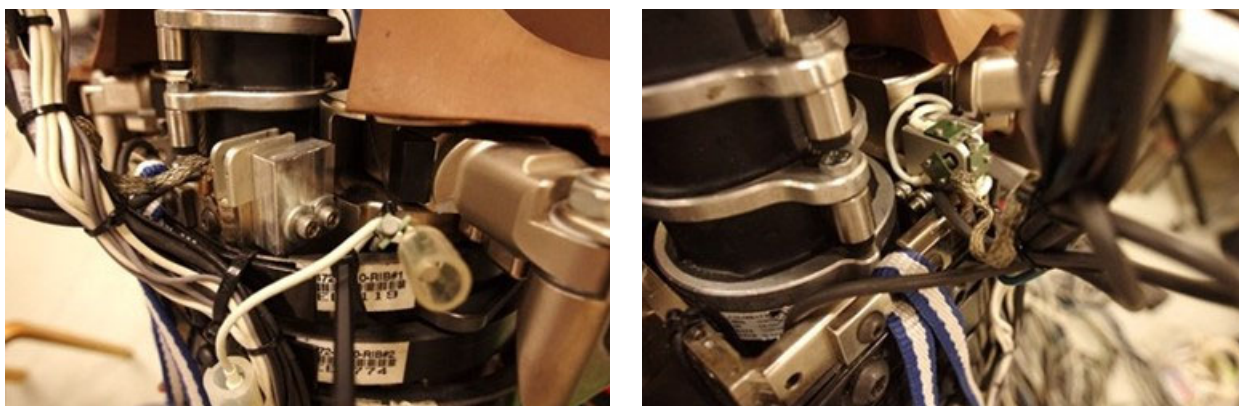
The T1 Accelerometer Mount Locating Block Installed on the Right Side of the THOR-50M Spine Box, Both Without and With Accelerometers
